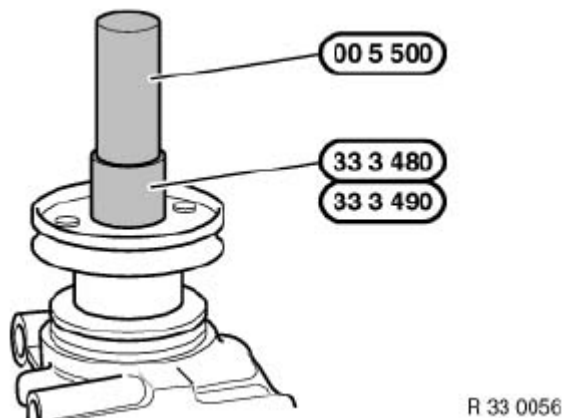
Identifying Special Tools (00 5 500 And 33 3 490)
